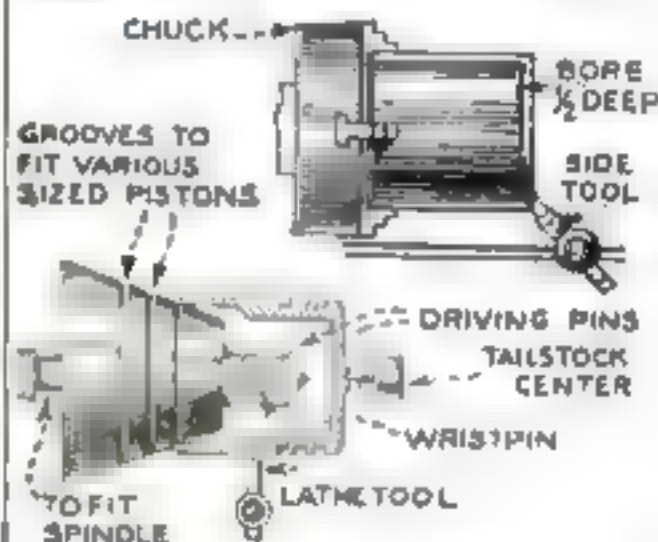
Regular chuck used for first operation on piston, and mandrel for finishing cuts
